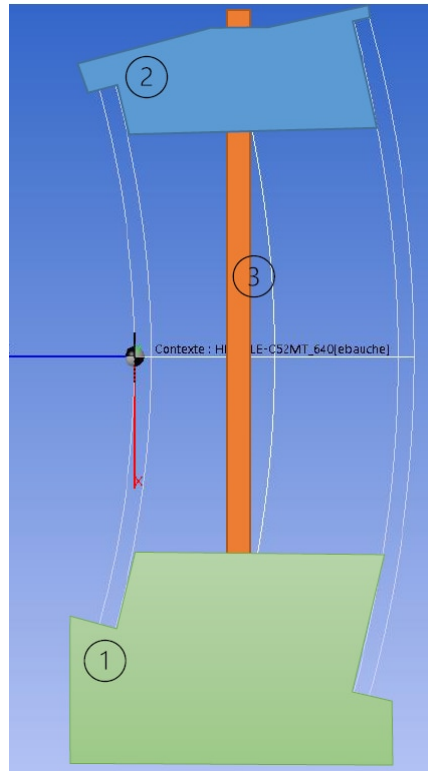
Fixing system for the machining of the external part of the tube. The system is composed by the base (1), the adjusted plug (2) and a threaded rod (3) which regulates the distance between the base and the adjusted plug. The white lines indicate the curved tube compressed between the two supports (Fig. from [31]).
